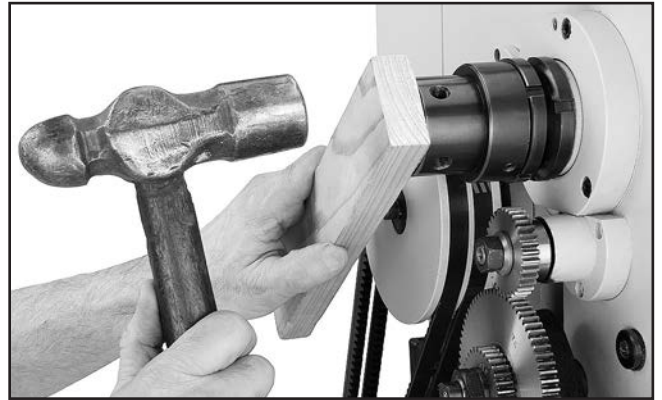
Un-seating spindle bearings to introduce spindle end-play.
